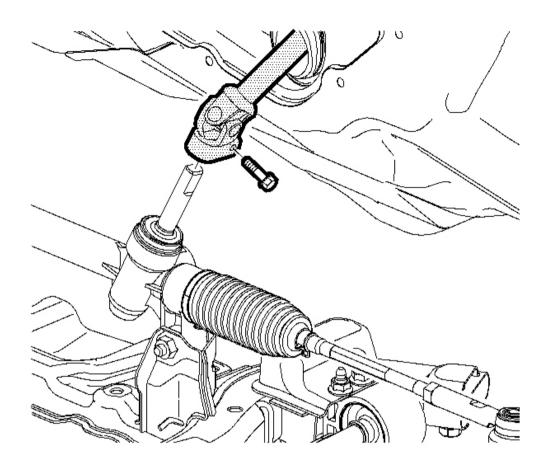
Lower Intermediate Steering Shaft & Pinch Bolt Courtesy of GENERAL MOTORS CORP.
